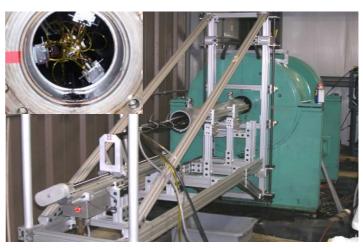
Rotor Bore inspection scanner testing on a calibration rotor.
